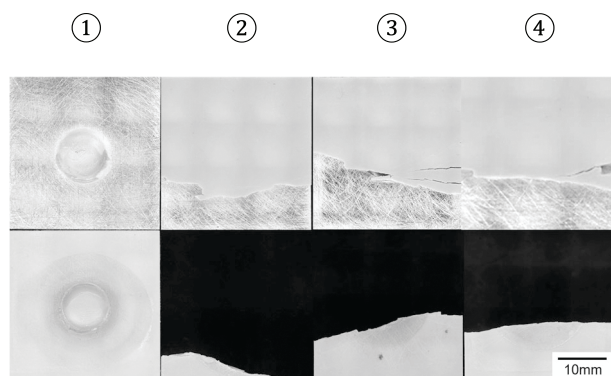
Fracture surface image of the joints after tensile shear testing
